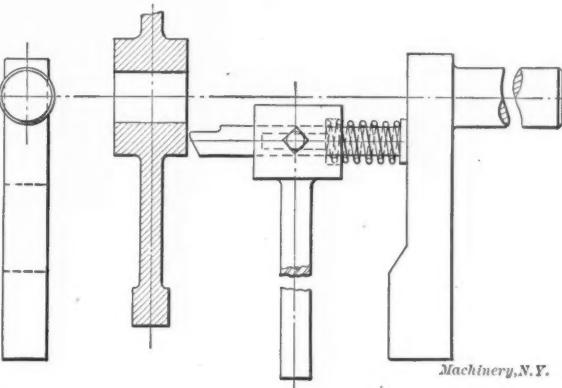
Facing Hub and Rim of a Gear Blank by the Tools shown in Figs. 2 and 3.
